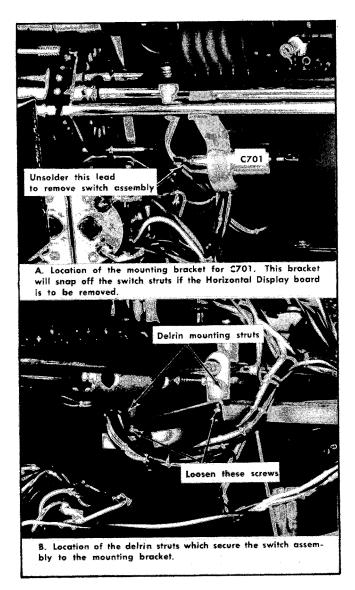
Removing the TIME/DIV switch. Local oscillator assembly removed to show the location of the mounting hardware.
